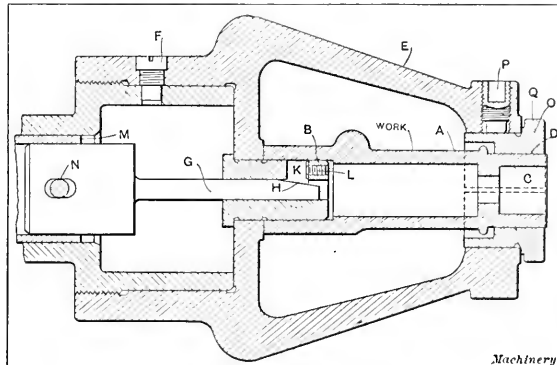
A Fixture which holds Work by Expansion and Contraction
